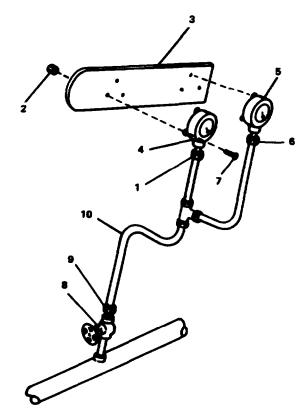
Repair Piping Gauge Assembly (Typical).
